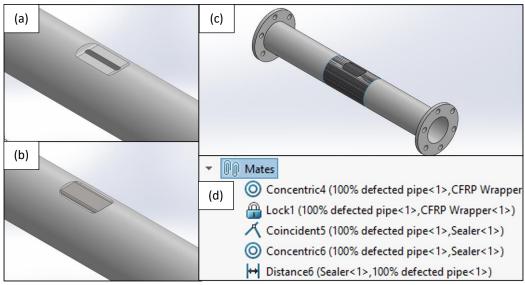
(a) Insert Defected Pipe, (b) Assemble Sealer, (c) Assemble CFRP Wrapper, (d) Mates that are used to assemble
